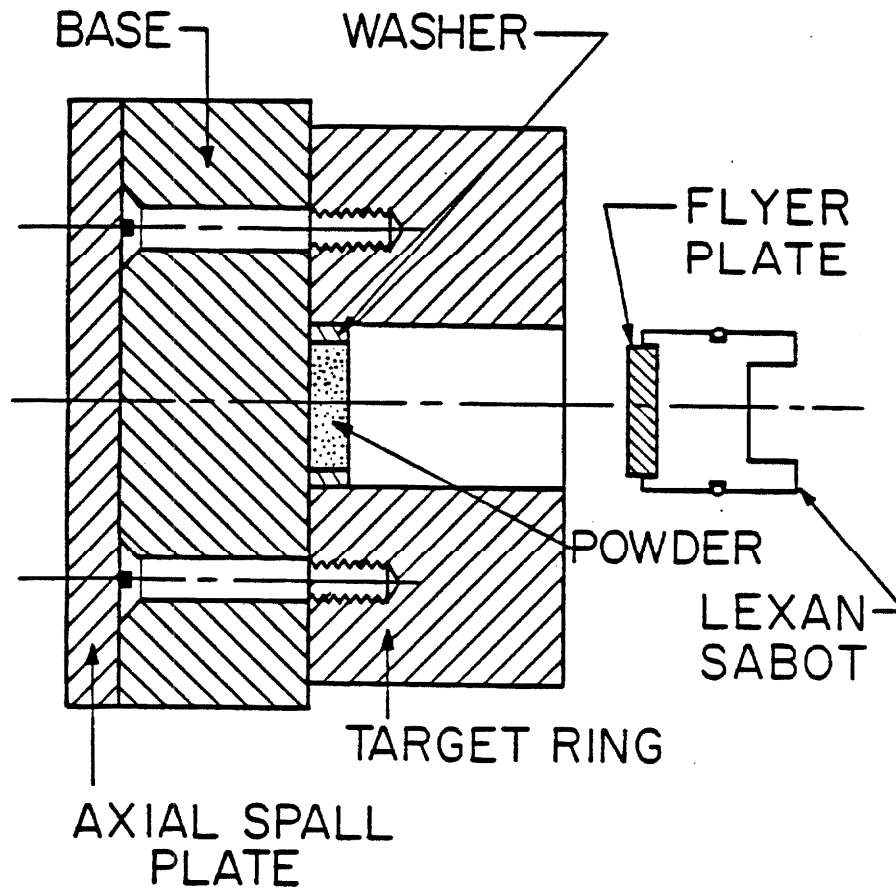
Schematic cross section of the target recovery assembly. The dimensions of the target assembly are: a) 8.3 cm O.D. X 2.0 cm I.D. X 2.5 cm thick target ring, b) 8.9 cm diameter X 2.5 cm thick base, and c) 8.9 cm diameter X 3.8 cm thick axial spall plate.
